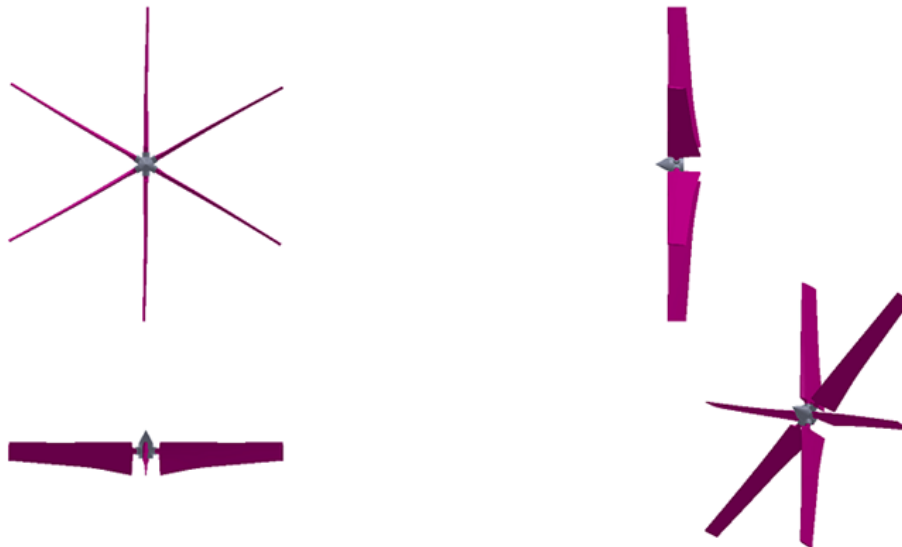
Typical Six Bladed Fan assembly (Actual dimension can be collected from Mr. Sharad Saxena, Email: saxenas@iitk.ac.in)
